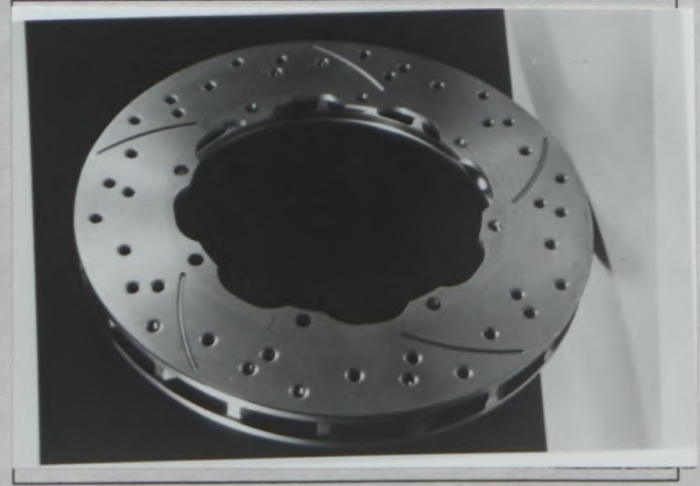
FRONT AND/OR REAR BRAKE DISC
